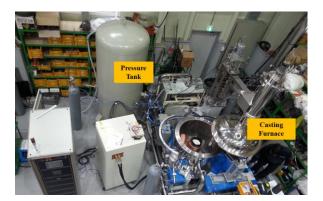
Engineering-scale injection casting equipment (Max. U-Zr charge: 20kg, installed at KAERI
